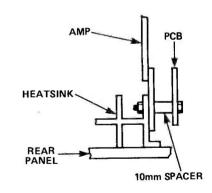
Mounting arrangements for the amplifier module and PCB.
